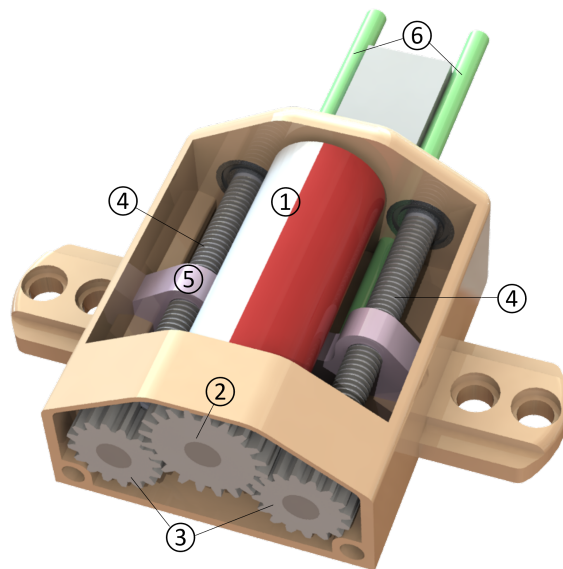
Orthogonal view of the box with parts of the casing removed, showing the actuation mechanism. It shows the cylindrical magnet (1), drive gear (2), gearbox (3), screw spindles (4), driving plate (5) and SMA rods (6).
